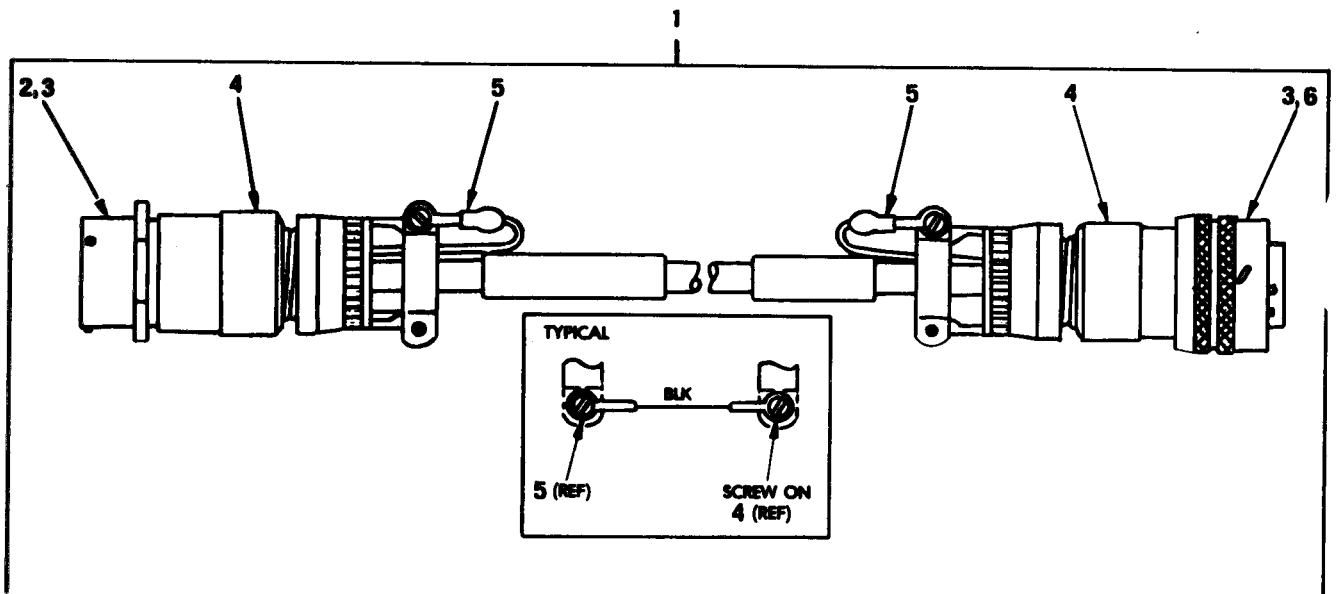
Adapter cable assembly, W6A (467-106-001) W6B (467-107-001) W7A (467-108-001) W7B (467-109-001) W8A (467-110-001) and W8B (467-111-001) (sheet 1 of 2)
